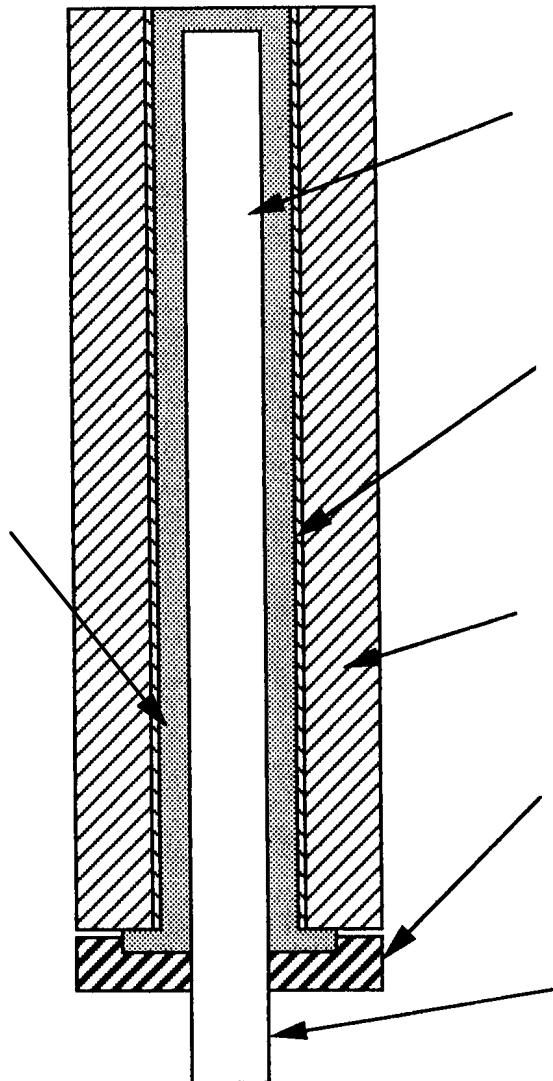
The autoclave moulding arrangement used to manufacture the push-rods.
